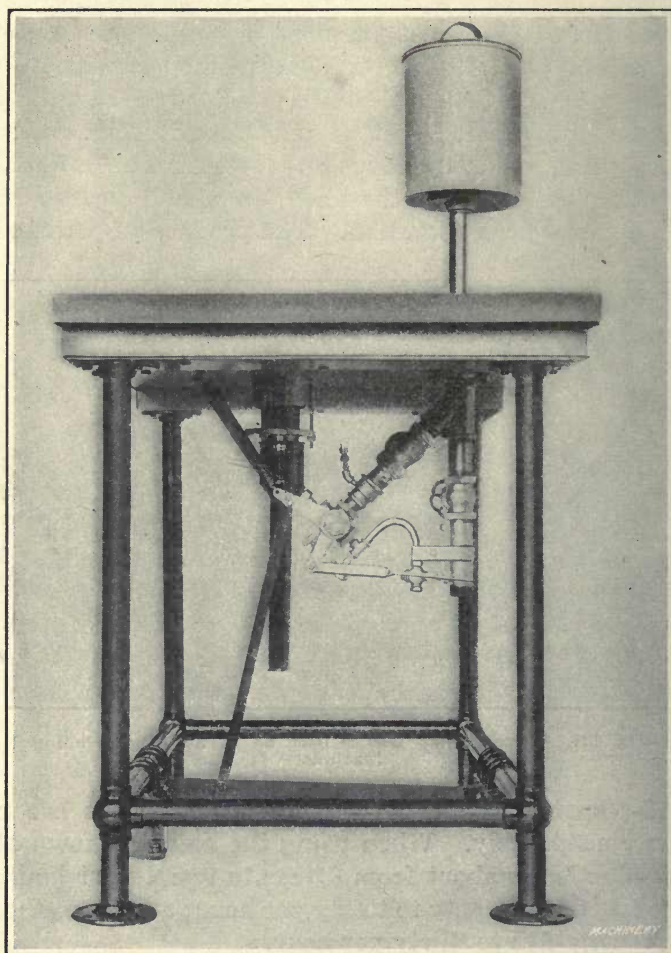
Machine built by Spray Engineering Co. for spraying Interior of High-explosive Shells
